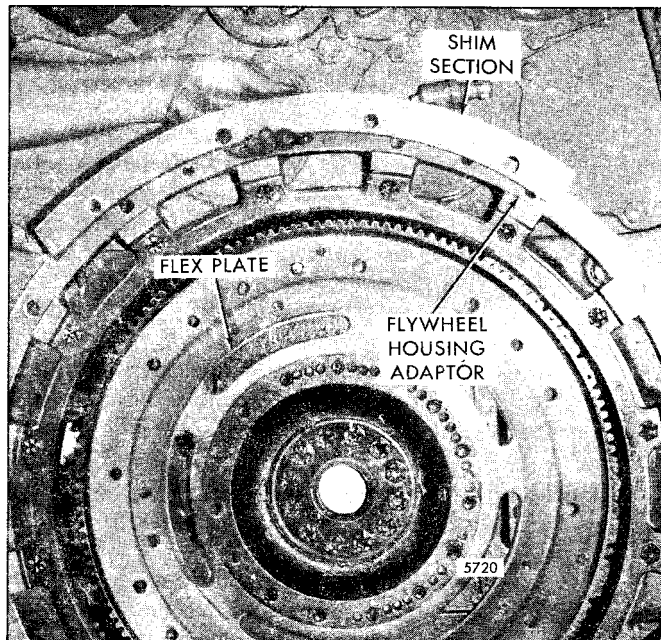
Installing Engine Flywheel Housing Adaptor Shim Section
